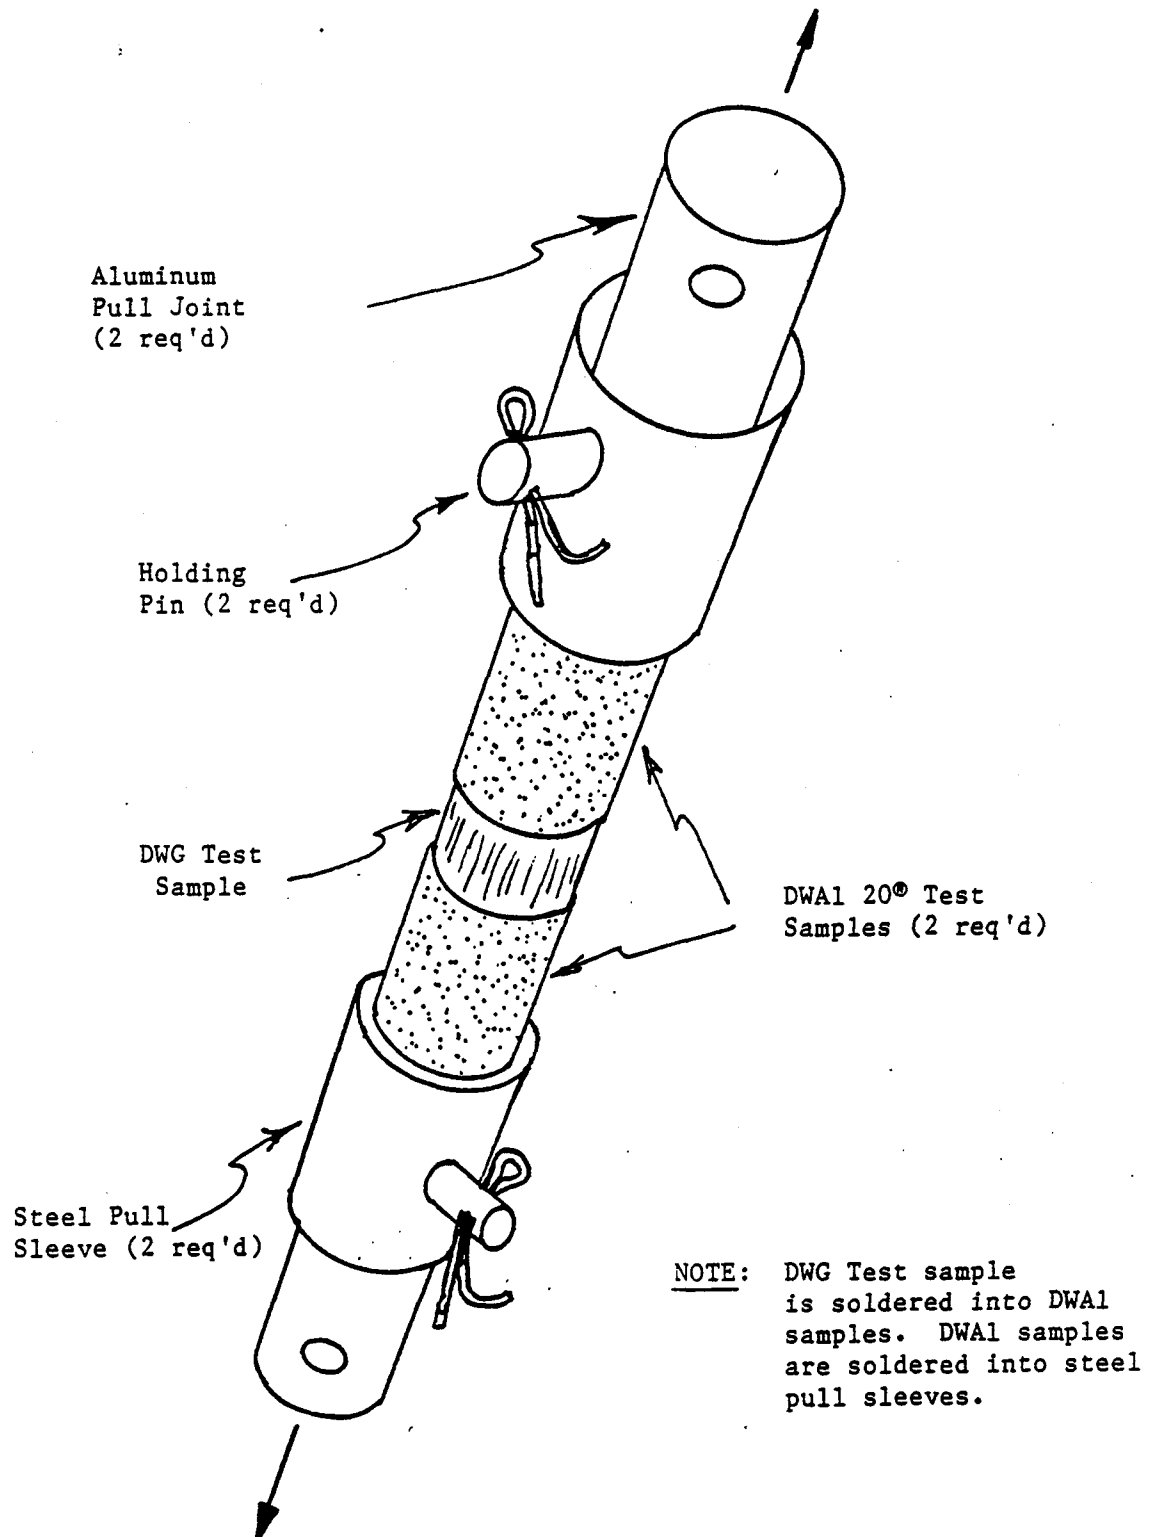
Tensile Test Arrangement for Evaluating Solder-bonded Tubular Parts
